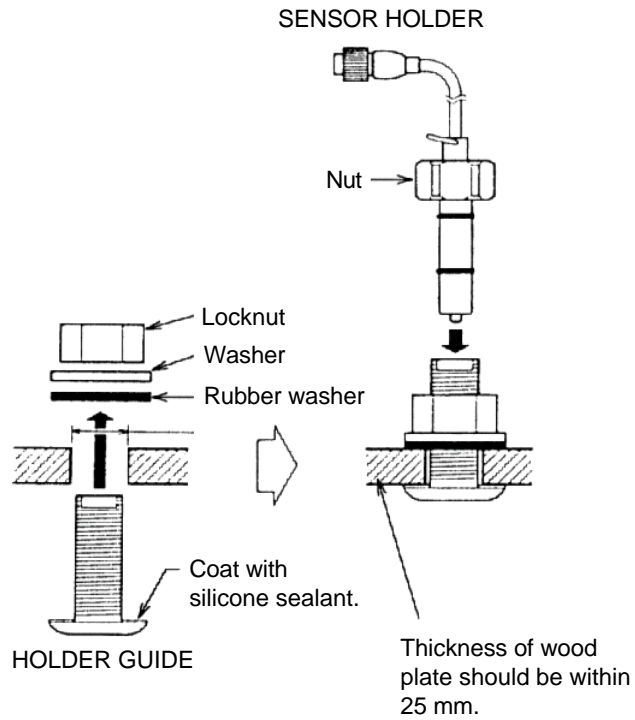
Thru-hull mount water temperature sensor T-03MSB
